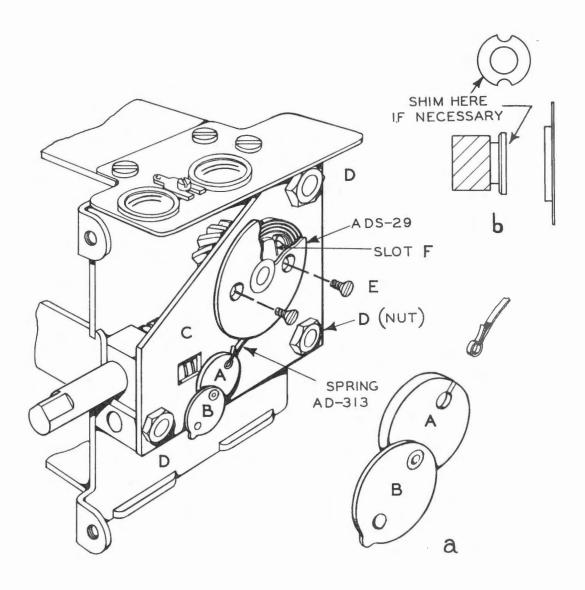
Condenser — Spring Mounting ARA or AN/ARC-5 Receiver
